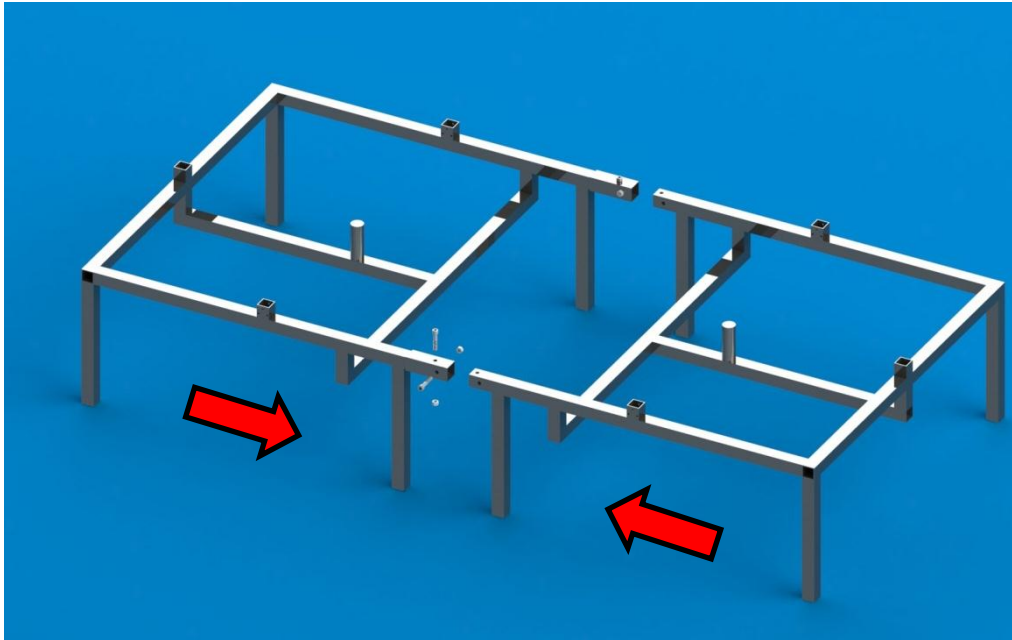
Exploded view of lower frame. Each half fits together via the 2" collar in the middle
